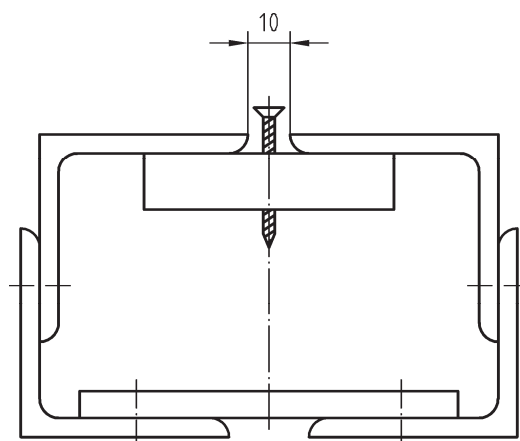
Principle of testing face screwholding on boards of < 15 mm thickness
